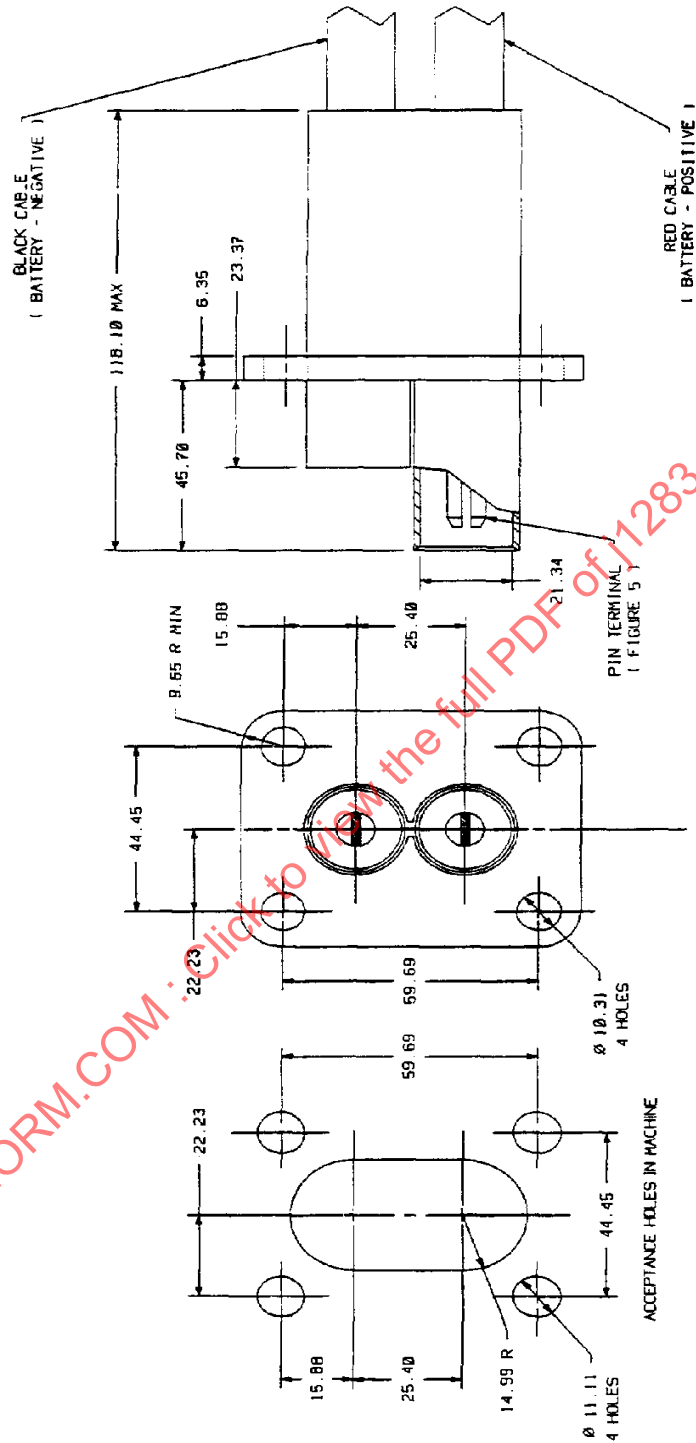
RECEPTACLE ASSEMBLY—STRAIGHT
